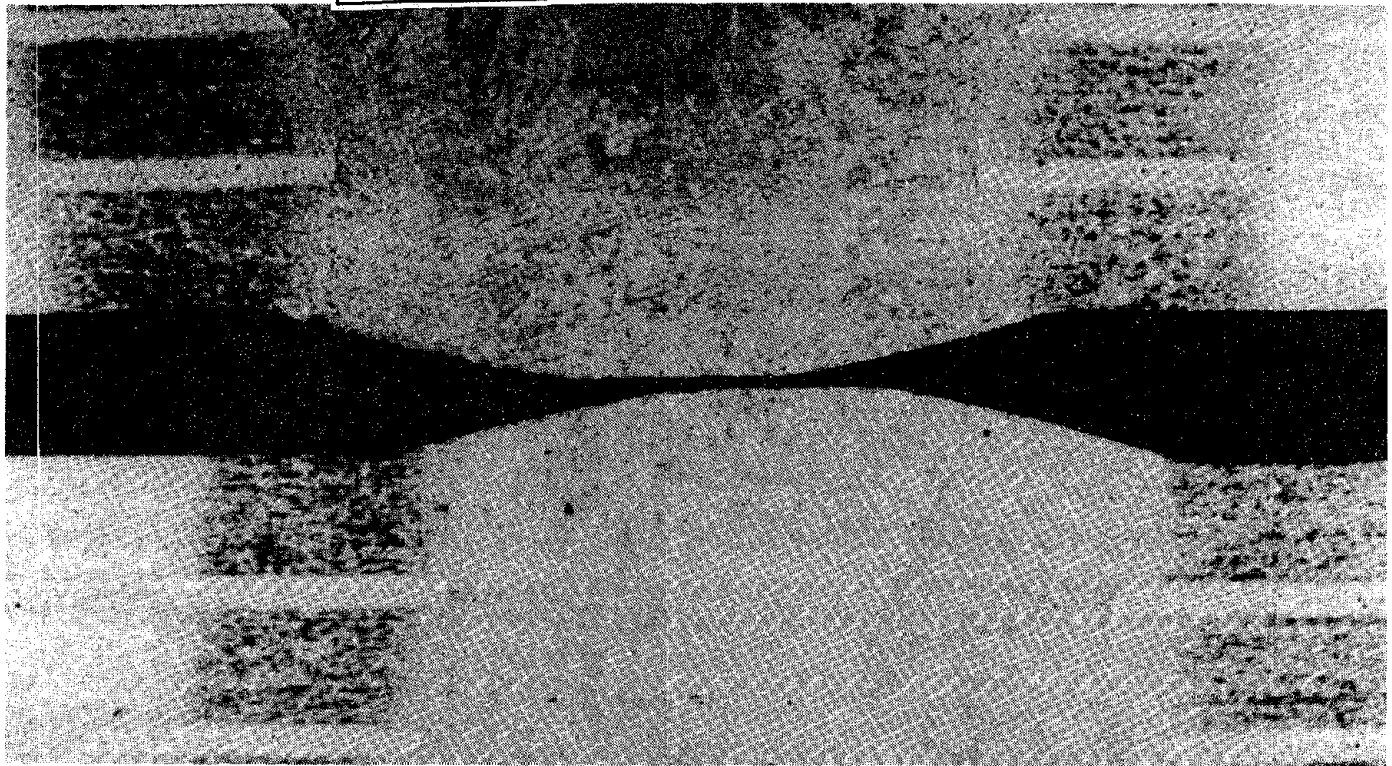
Weld in 0.008 In. Interlayer Laminate Aluminum Plate (20X Magnification)
